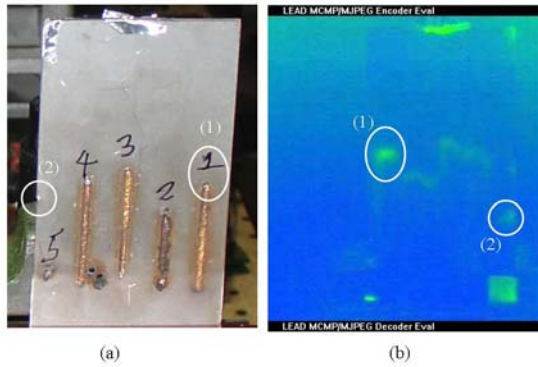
Real and thermosonic images of the welded SUS plate
